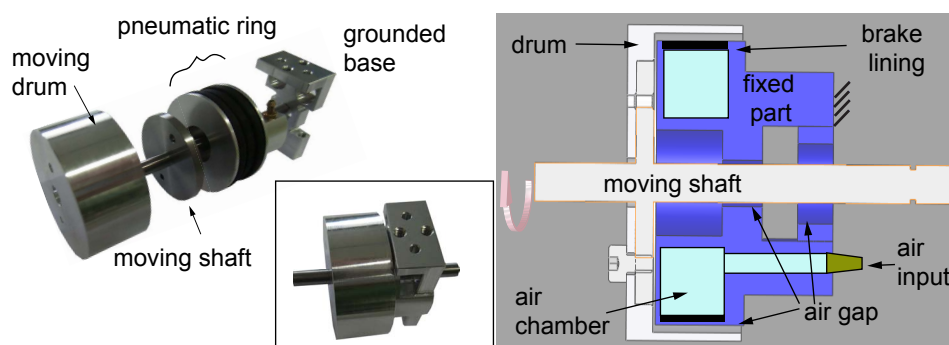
Exploded view and assembly of the brake system. The pneumatic ring is static while the drum moves concentrically to it. When the pneumatic ring insufflates, the brake lining makes contact with the drum producing friction and thus, braking torque.
